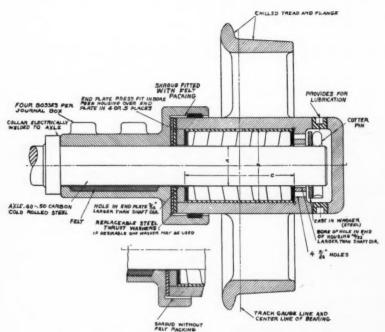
Standard closed-end wheel, 16-in. diameter, with 2½ x 7-in. bearing.
